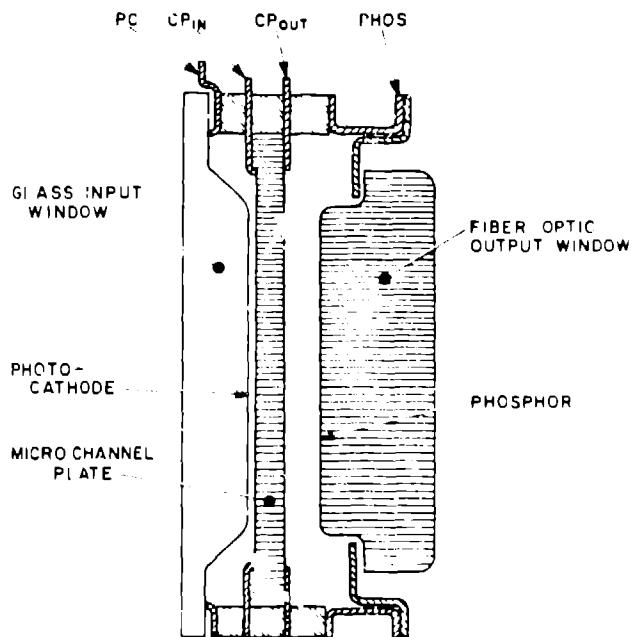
Cross-sectional drawing of a typical microchannel plate image intensifier tube.
